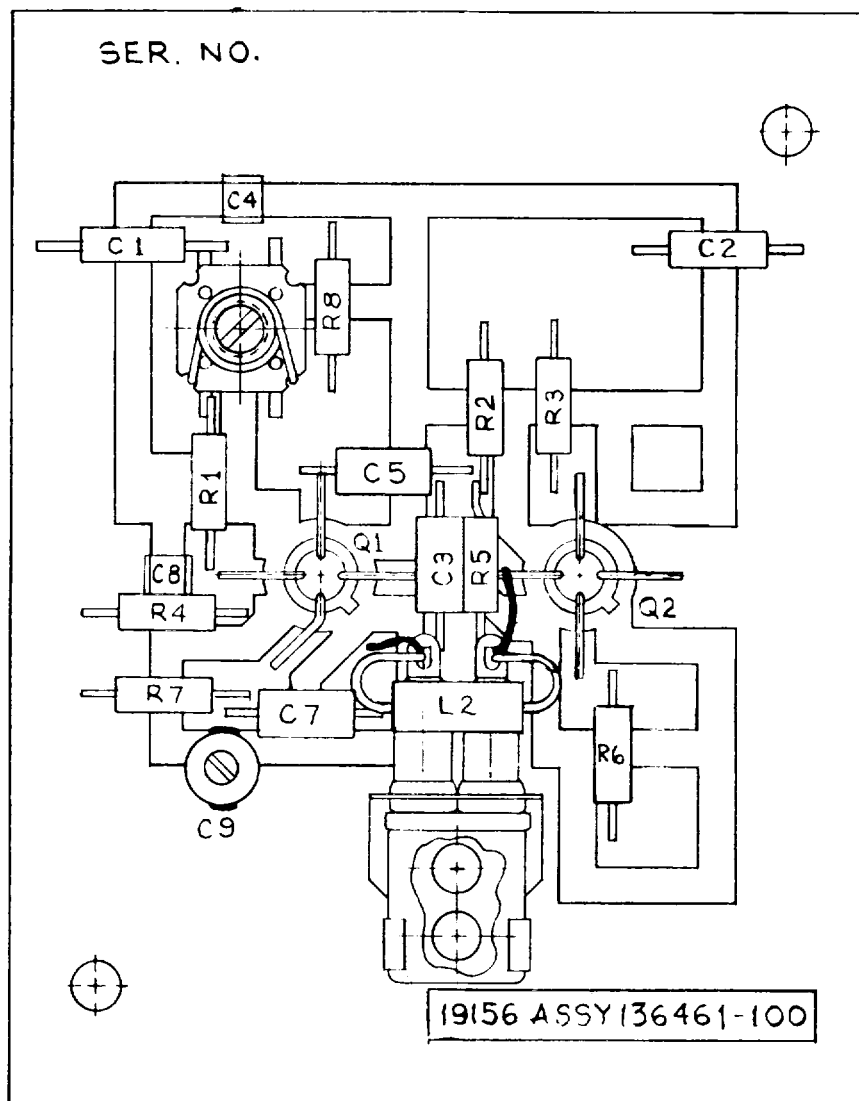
Oscillator Circuit Card Assembly, 1A4A3A1 Parts Location Diagram
